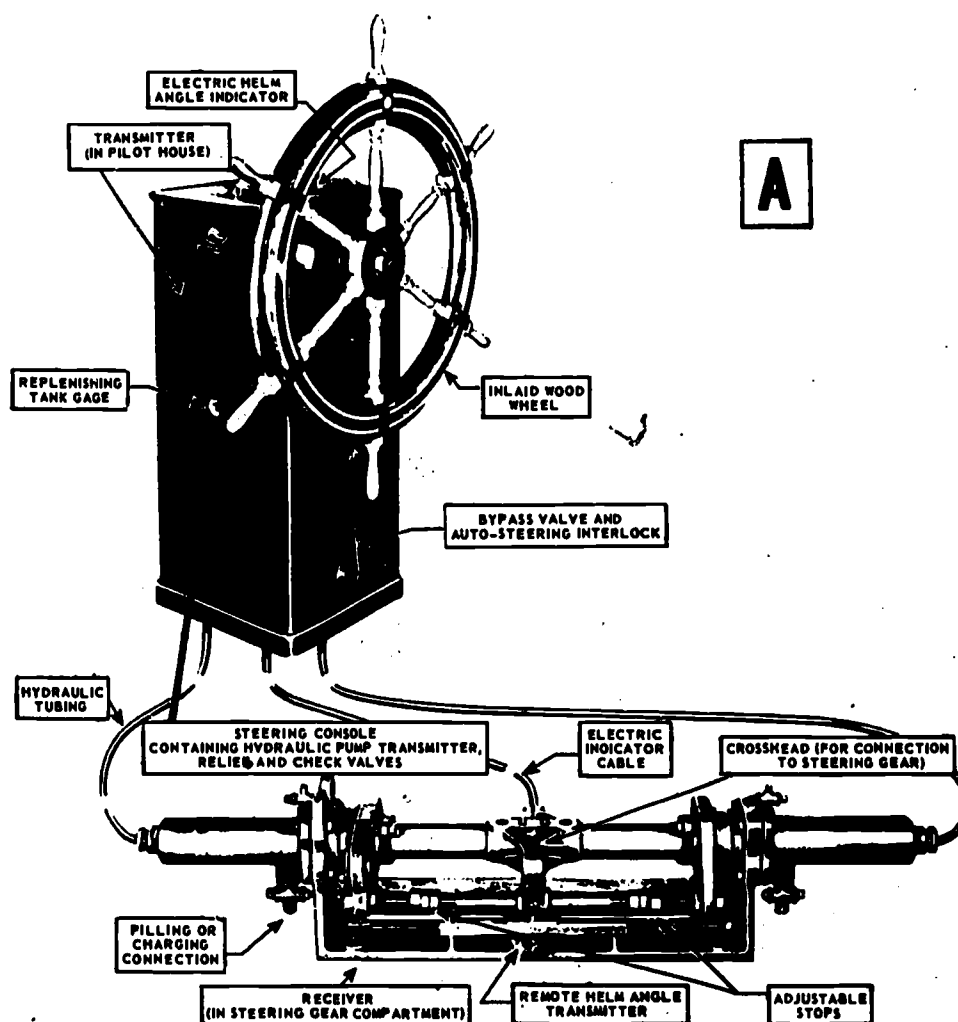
Hydraulic telemotor control. (A) Telemotor components.
